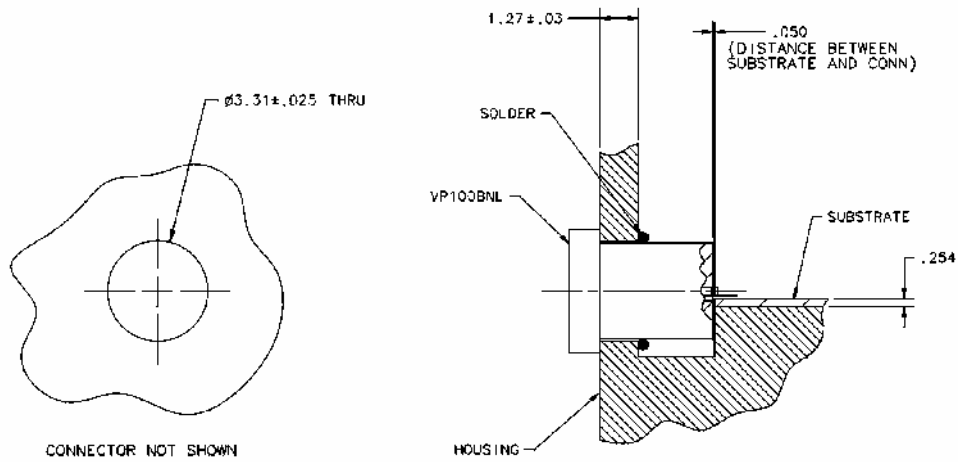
VP100CNL Mounting Hole Dimensions and Assembly Drawing for Thin-wall housing
